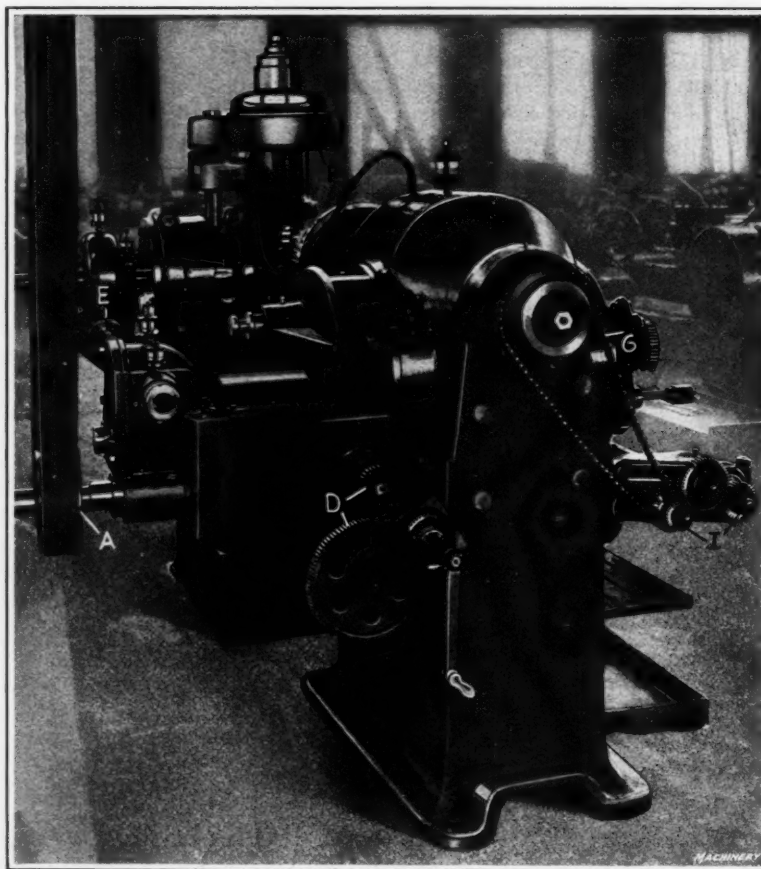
End View of Machine set up for hobbing Worm-wheels
